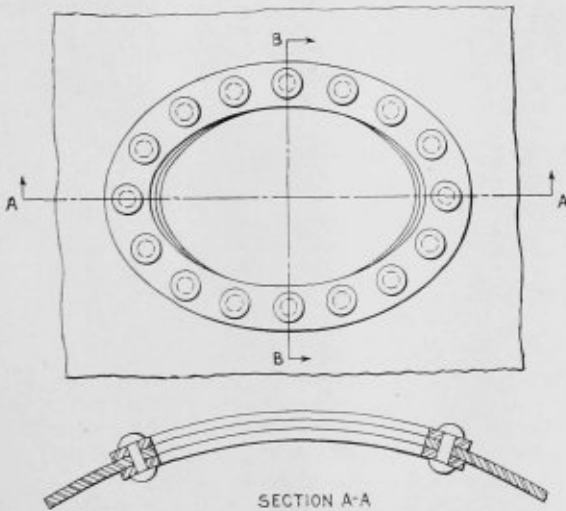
Reinforcement for a Cylindrical Shell Opening
